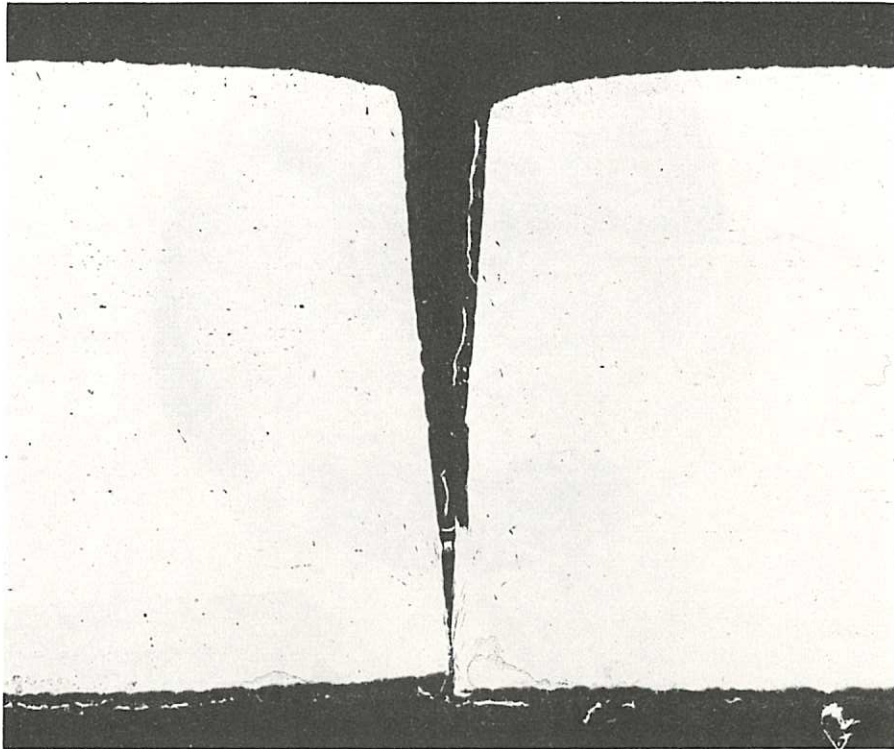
Laser weld in mild steel ( $3.5\text{kW}$ ,  $40\text{mm s}^{-1}$ )
